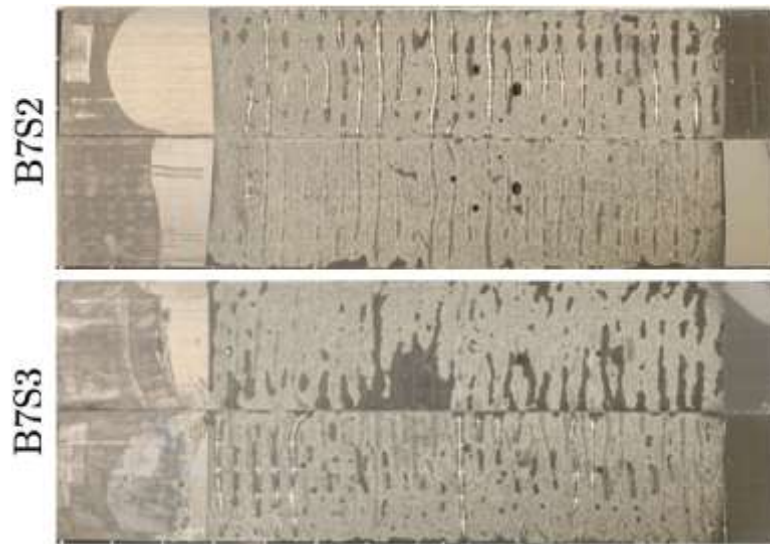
DCB DP190 adhesive post-testing visual inspection of the fracture surfaces. Crack propagation occurring from right to left.
